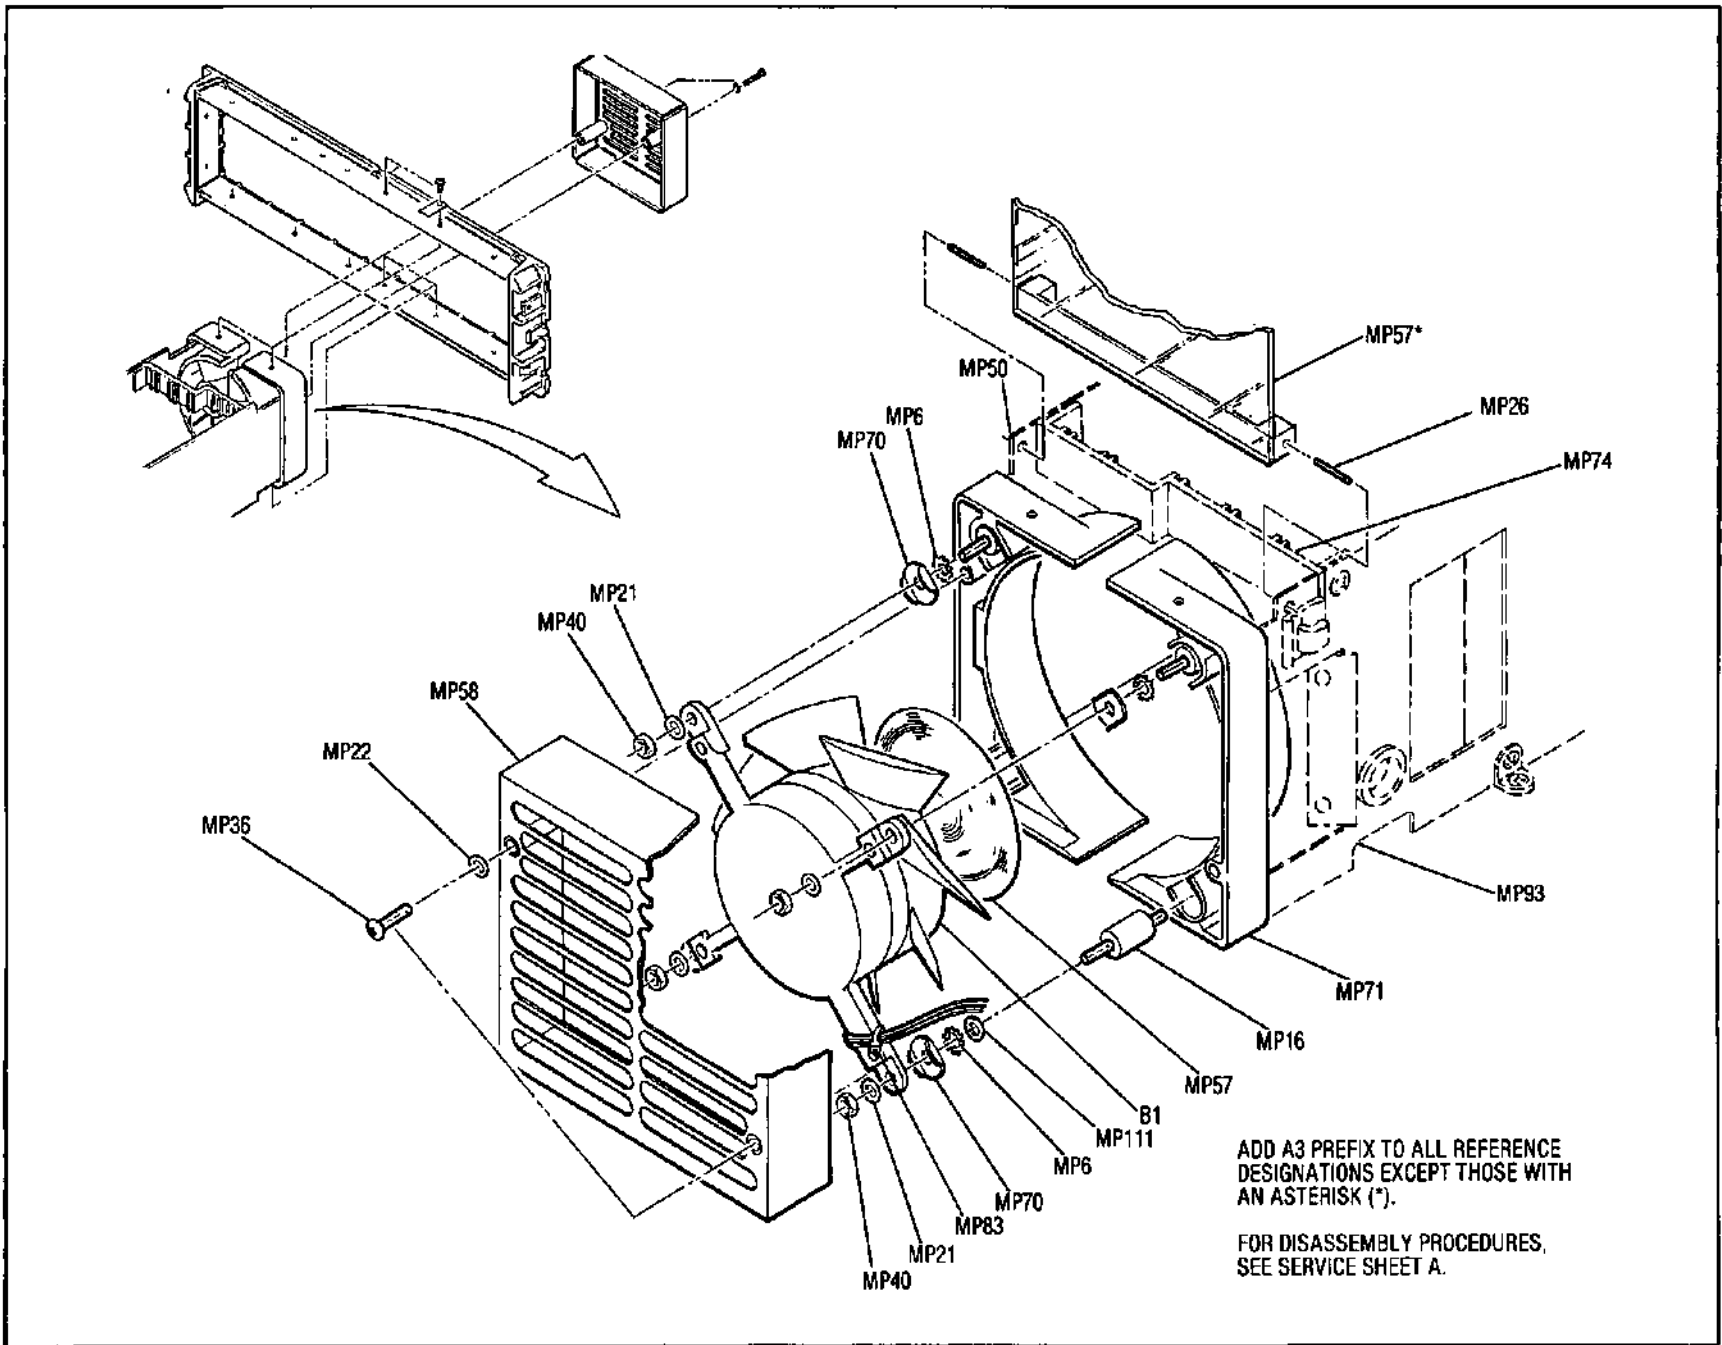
A3 Fan Assembly Illustrated Parts Breakdown
